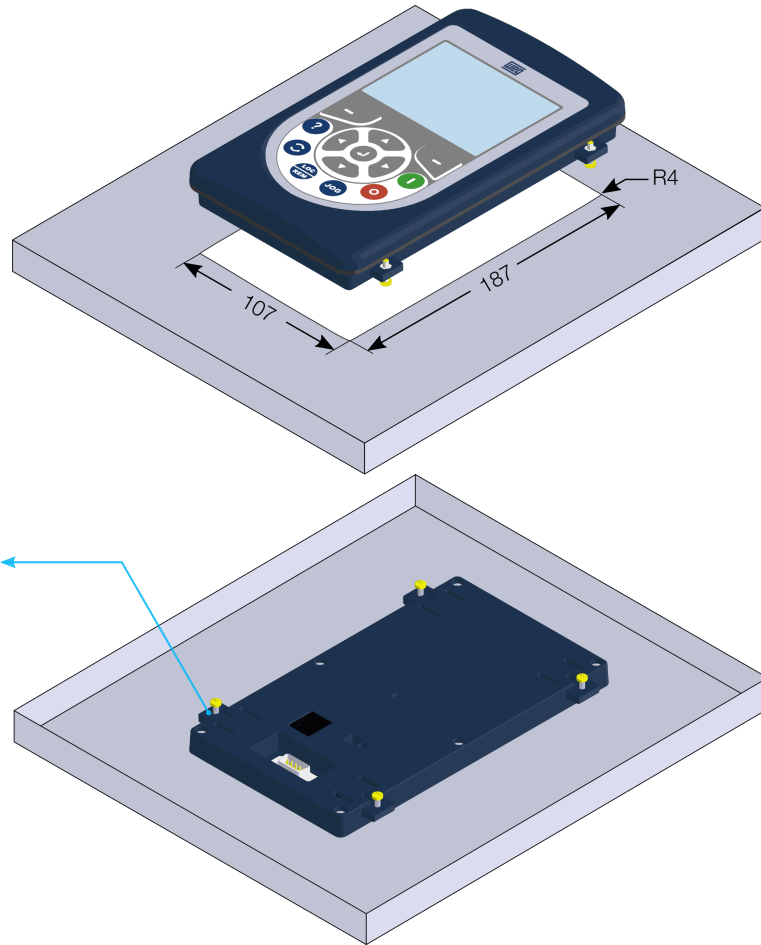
Size of the panel cut-out for fixing the HMI (in millimeters)
